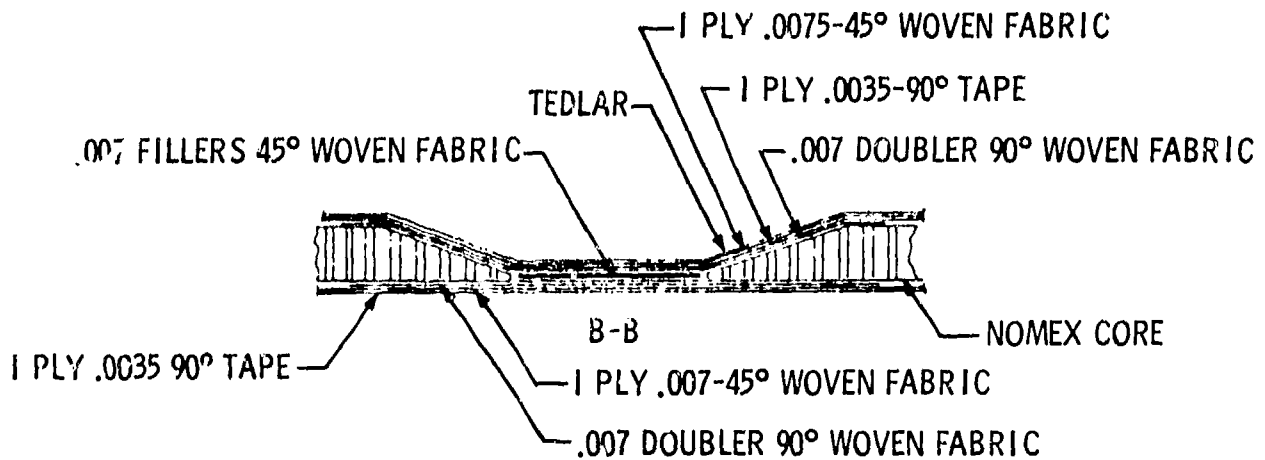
Layup of Composite B-727 Elevator Skins at Rib Location
